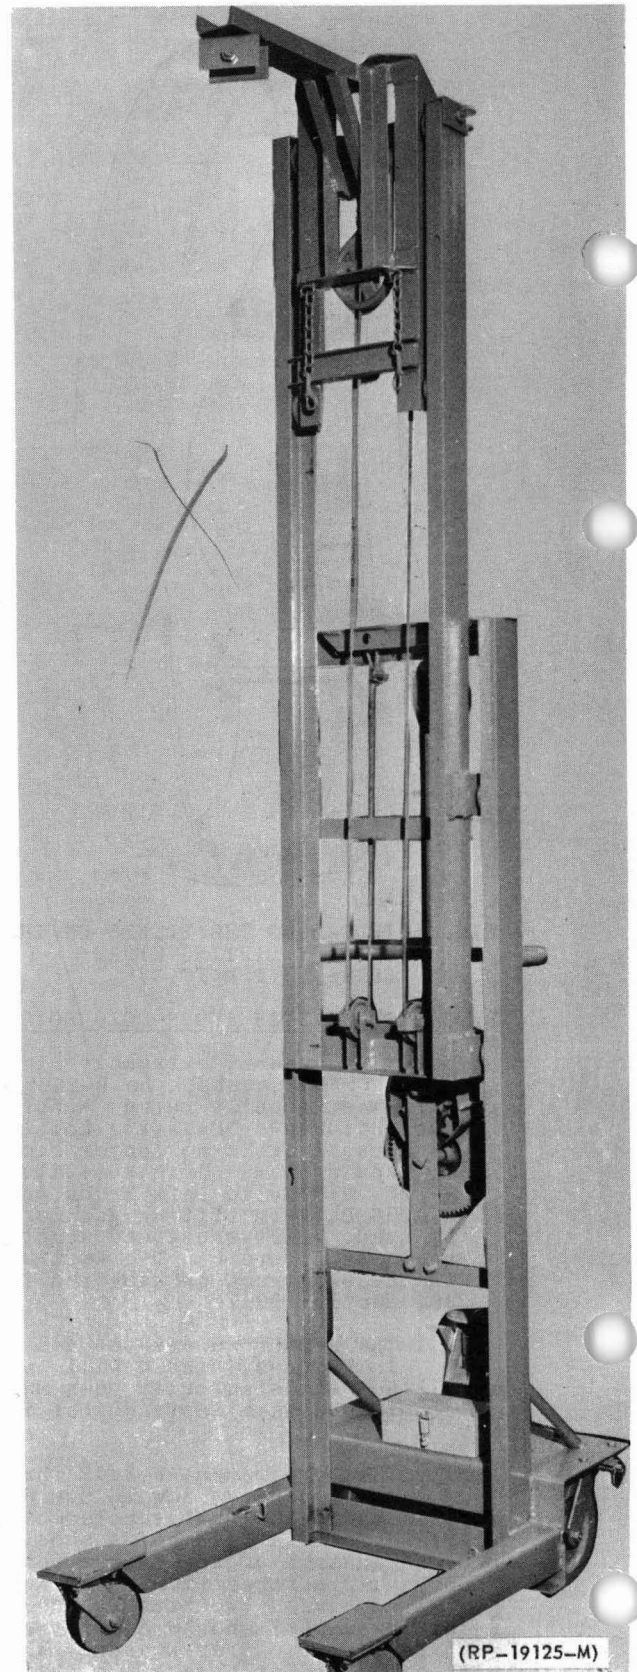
R-3448 TIER BATTERY HOIST FULLY EXTENDED. (PARS. 8.1, 8.2 & 12.2)
